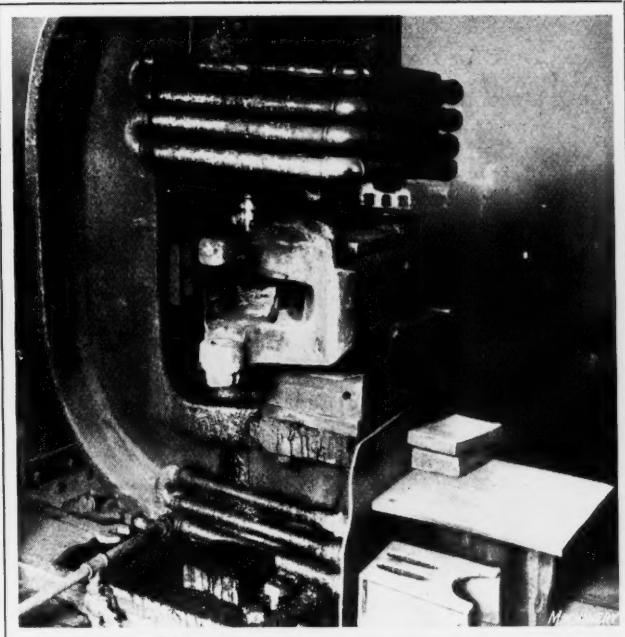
Special Hydraulic Press used for straightening the Shank of a Bent Car Coupling
